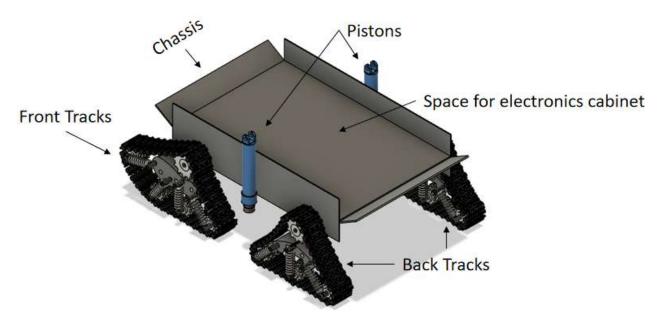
Isometric View of complete Chassis design without manipulator arm
